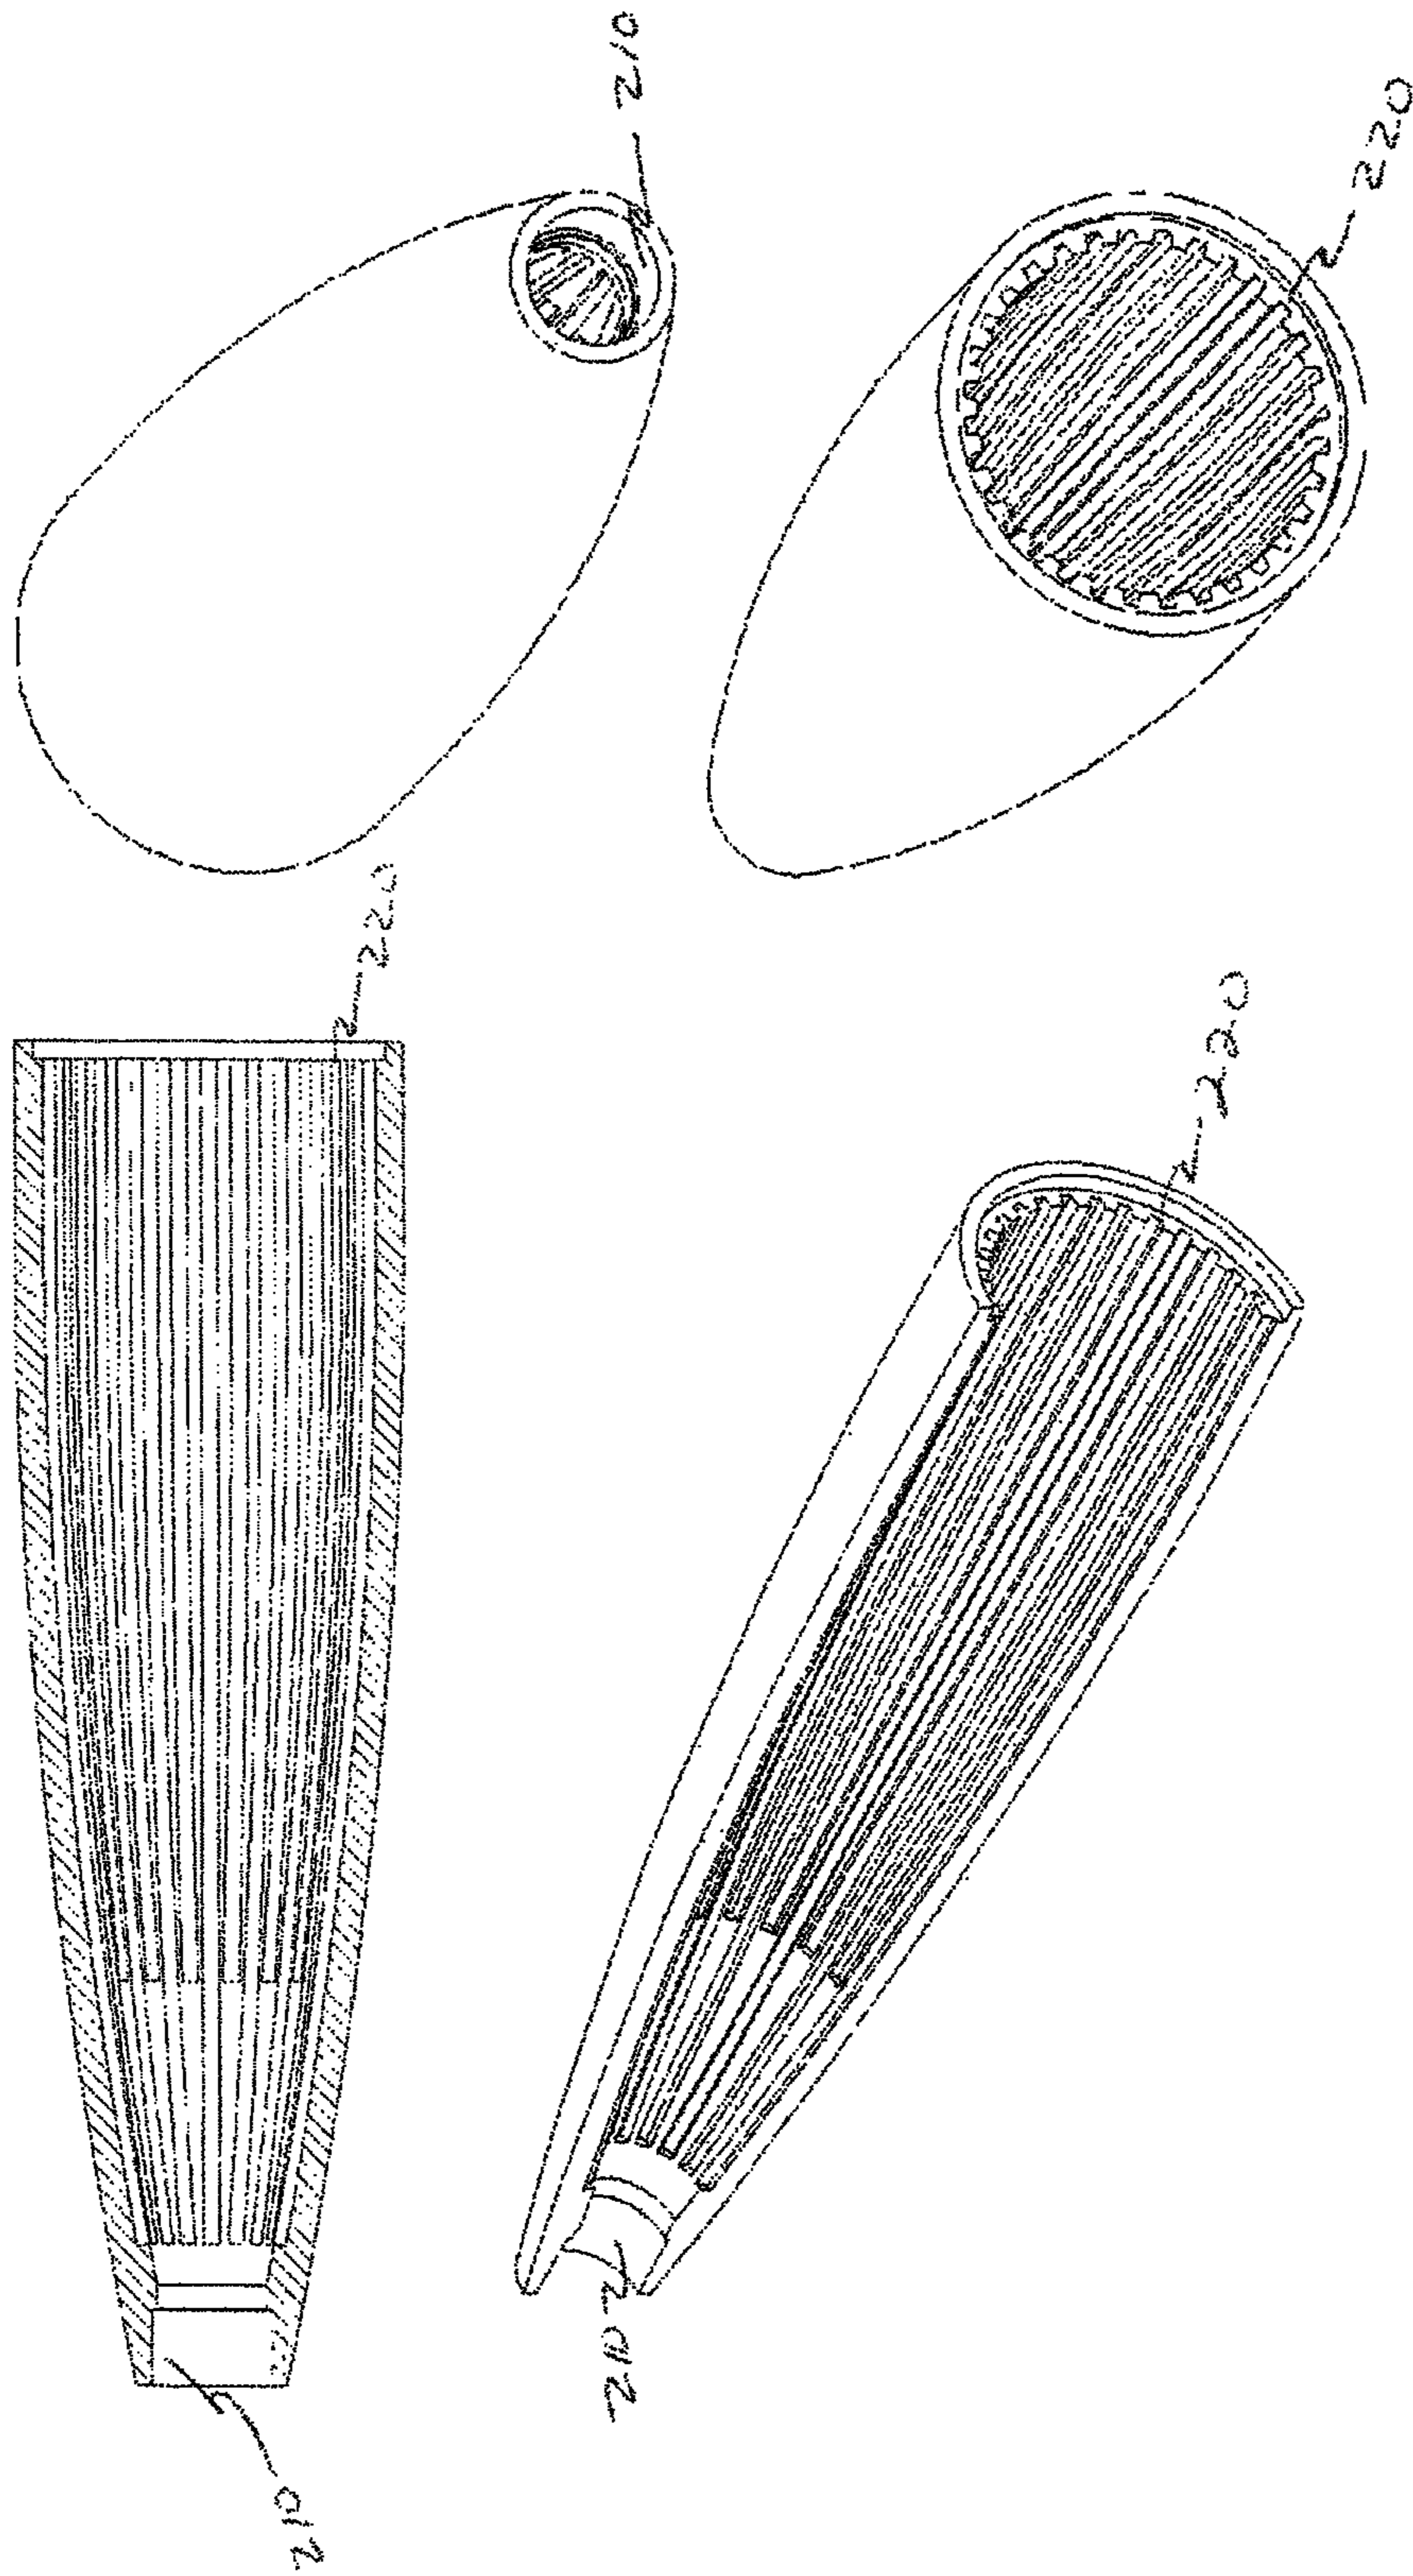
C – Cut Away Views 155mm Warhead (Assembly)
